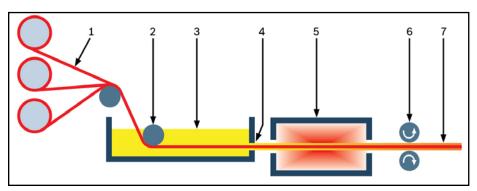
The key steps in the pultrusion process include: 1) continuous roll feed of reinforced fibers/ woven fiber mat; 2) tension control roll; 3) resin impregnator bath; 4) resin-soaked fiber; 5) bearing die and heat source; and 6) fiber pull mechanism.
